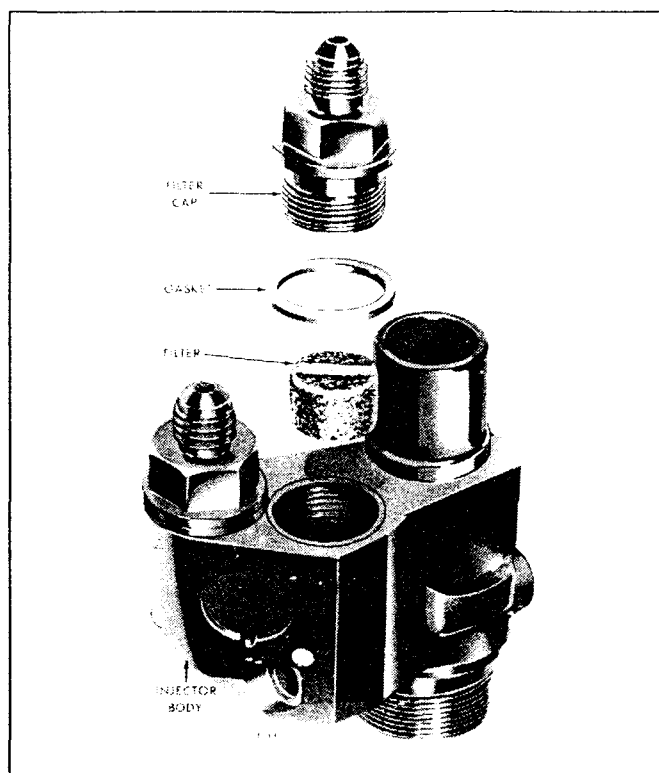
Details of Injector Filters and Caps and Their Relative Location
